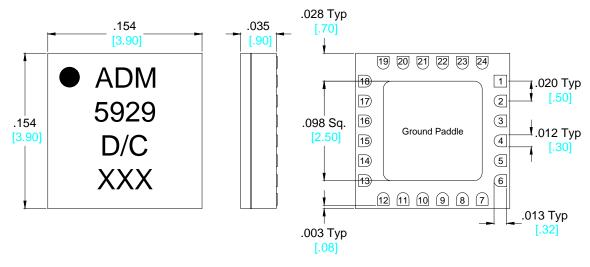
A drawing of a 4mm QFN package. Alternate dimensioning: [ mm ]
